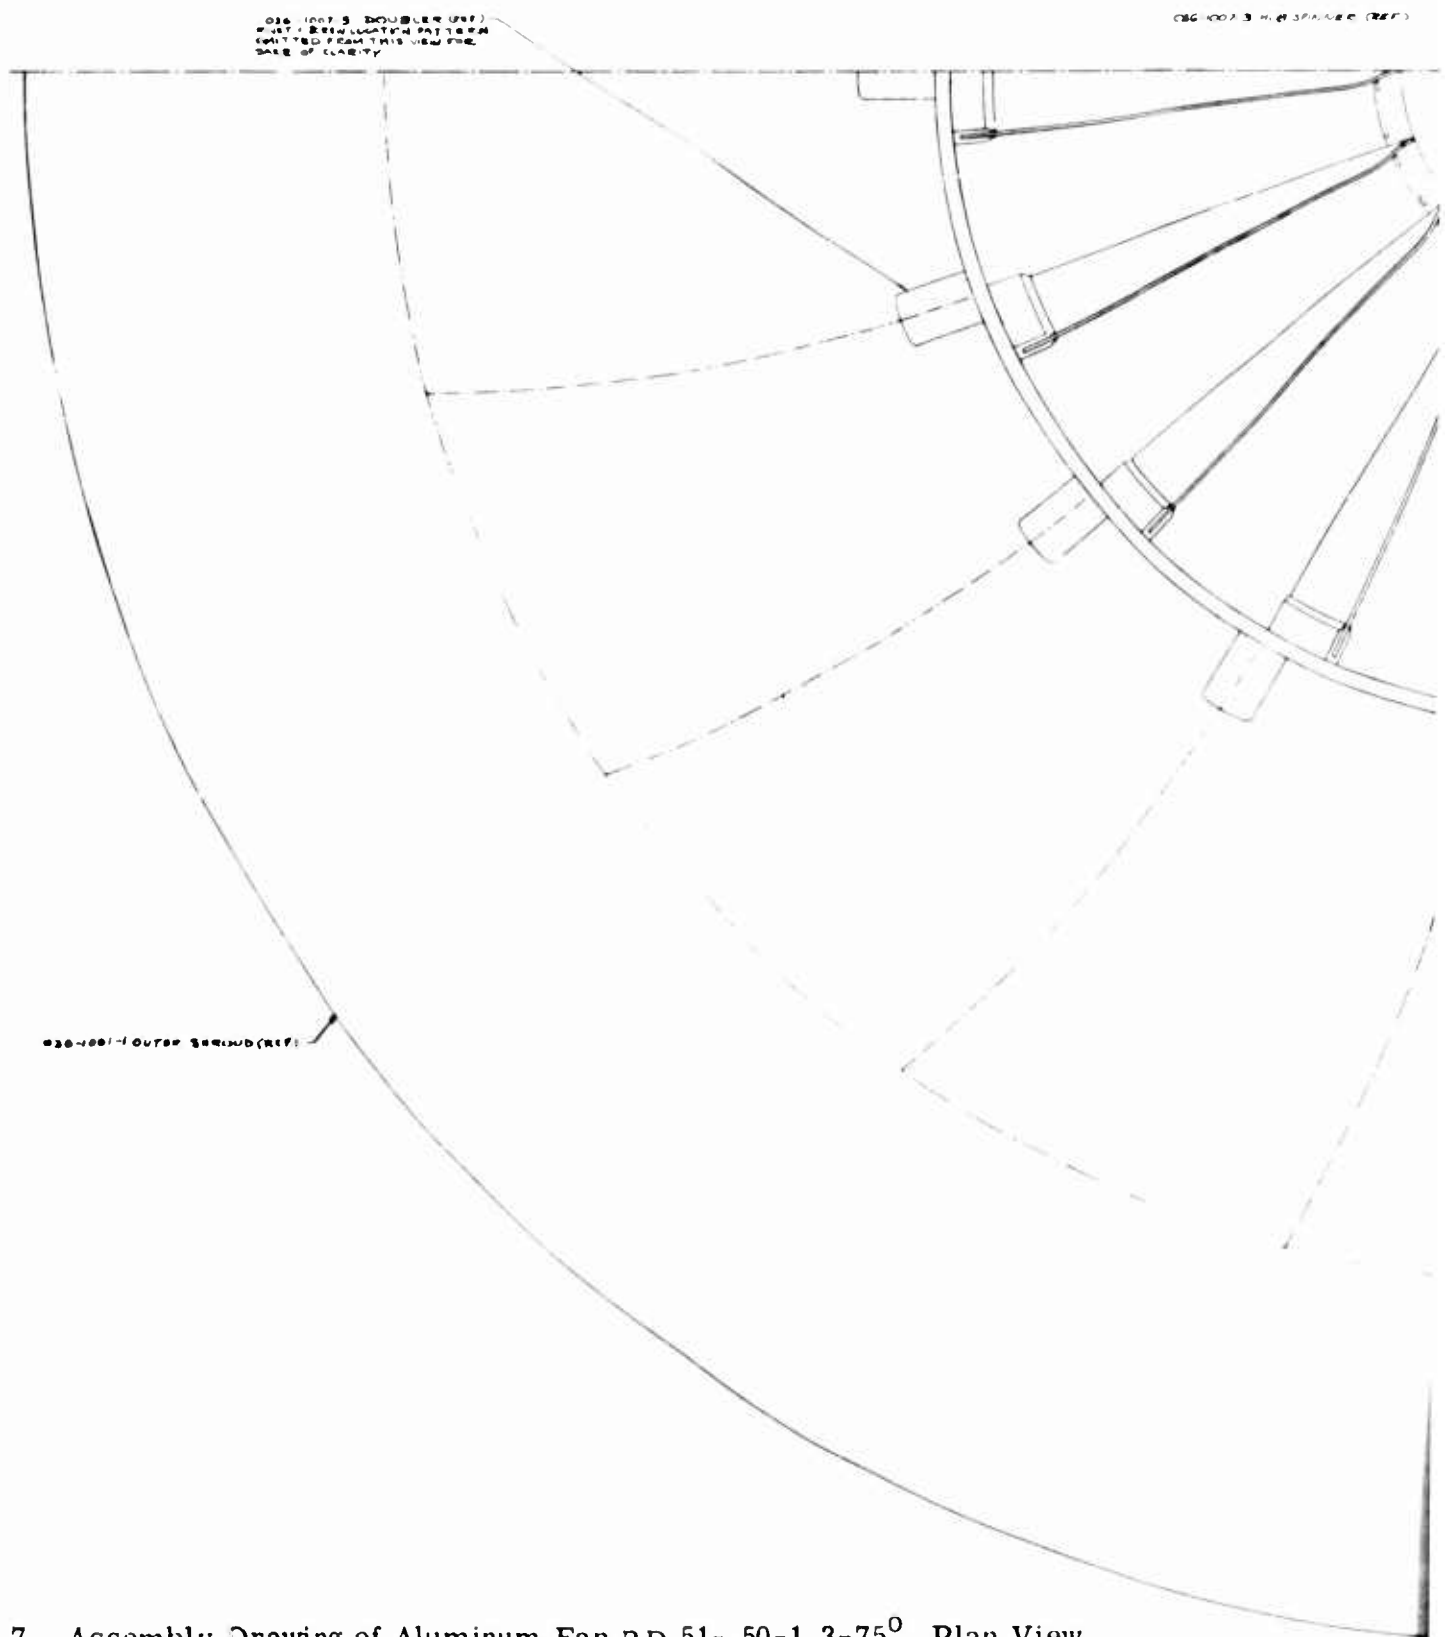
Assembly Drawing of Aluminum Fan RD 51-.50-1.3-75⁰, Plan View.
